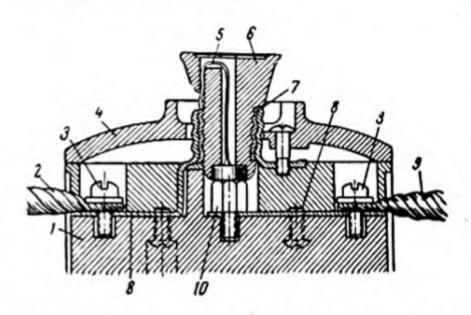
Arrangement of parts in a single-pole screw-plug fuse unit:
